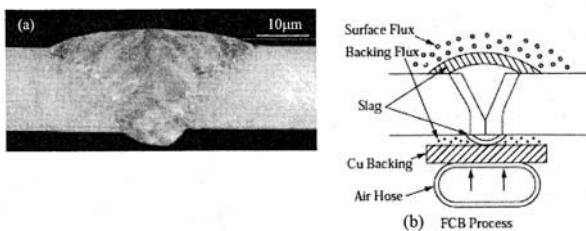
(a)Typical cross section of one-side one-pass SA weld, and (b)weld assembly of FCB welding as an example of one-side SA welding¹⁰⁾.
